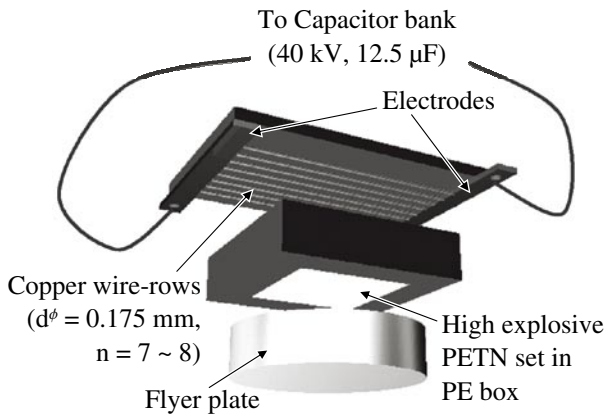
Explosive driver system for circular flyer plate using wire-row explosion techniques.
